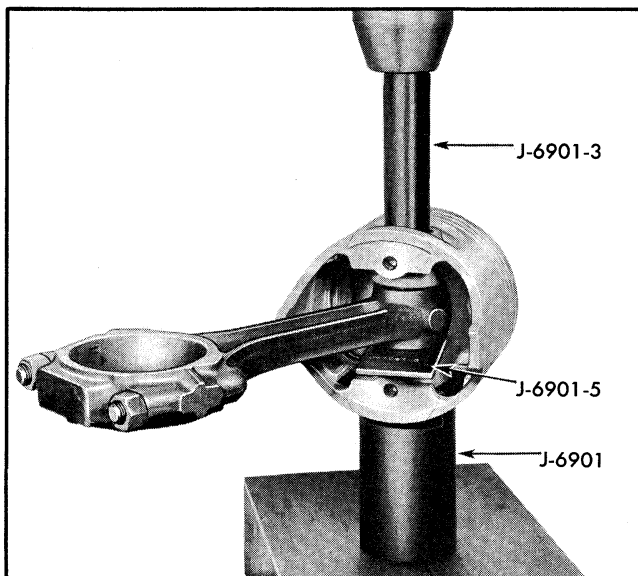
Piston Positioned in Arbor Press for Removal of Pin
